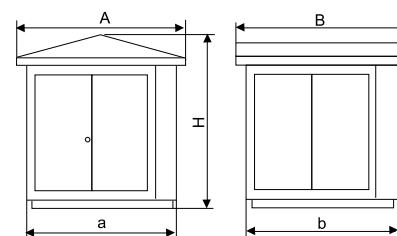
External drawing of ZBW series box-type transformer substation ("Delta" configuration)
